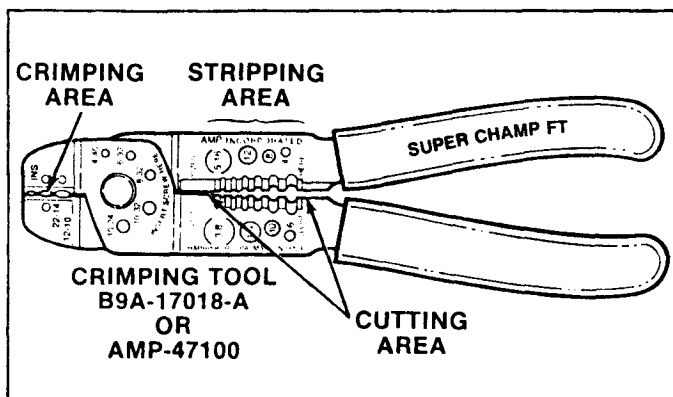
STANDARD STRIPPING/CRIMPING TOOL
